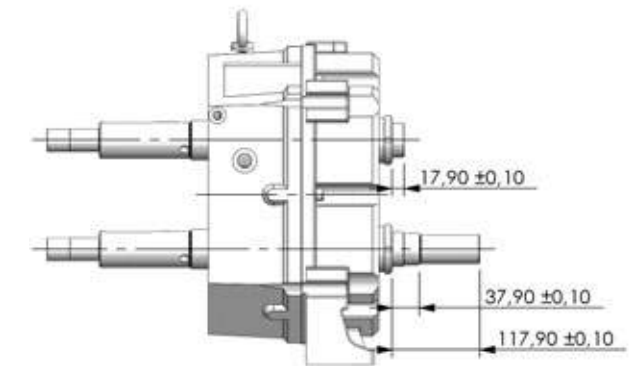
Assembly of gearcase (step 3) and measures to preload the bearings (Version P-H).
